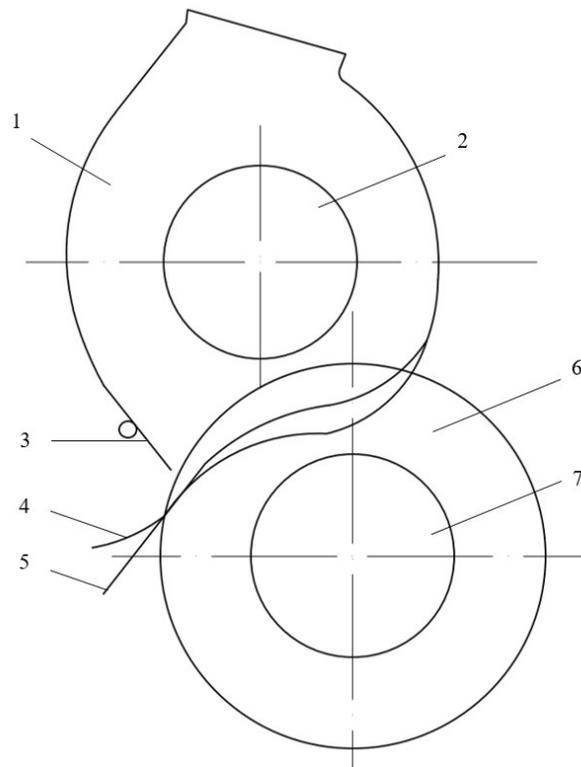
Schematic of a 5LP linter working chamber with EN profile and improved construction
